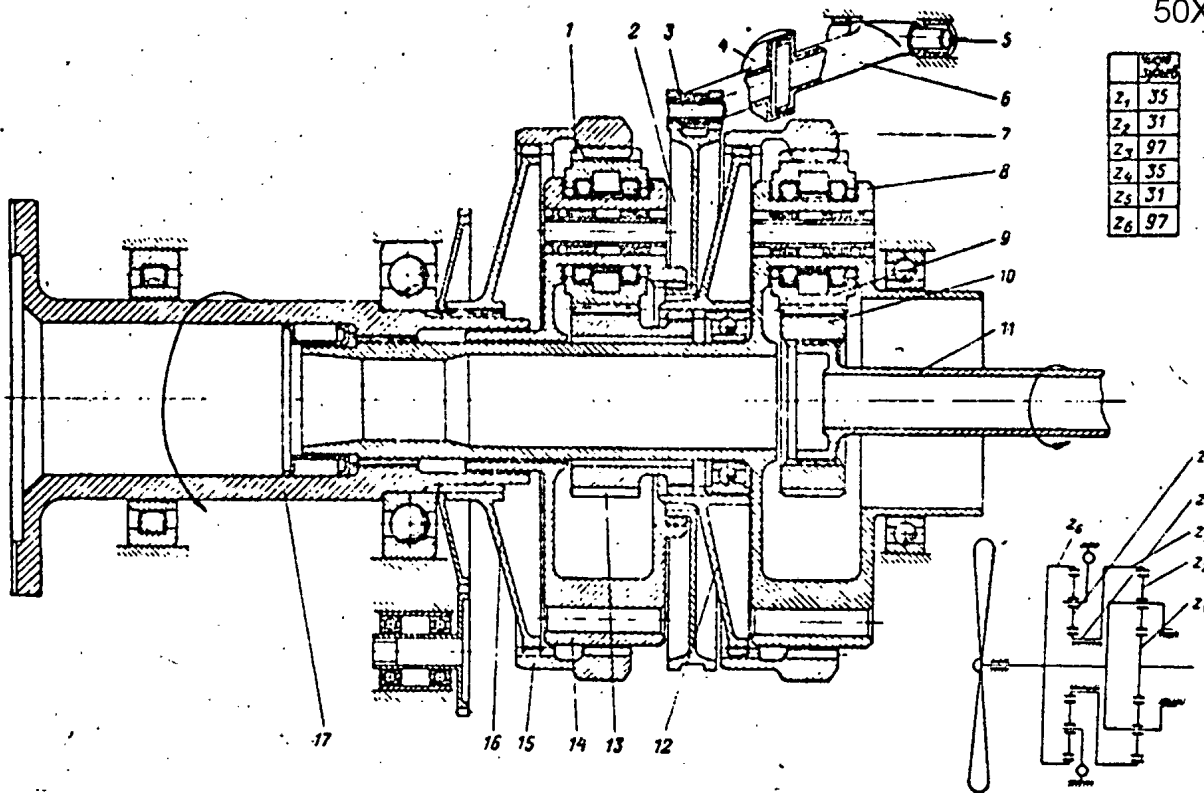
Schematic of Reduction Gear - 1. Planet gear; 2. Ring gear; 3. Pin; 4. Cylinder; 5. Pin; 6. Piston; 7. Inner ring gear [1st stage]; 8. Planet gear carrier; 9. Planet gear; 10. Sun gear [1st stage]; 11. Shaft; 12. Inner ring gear hub; 13. Sun gear [2nd stage]; 14. Countershaft housing; 15. Inner ring gear [2nd stage]; 16. Countershaft hub; 17. Propeller shaft
